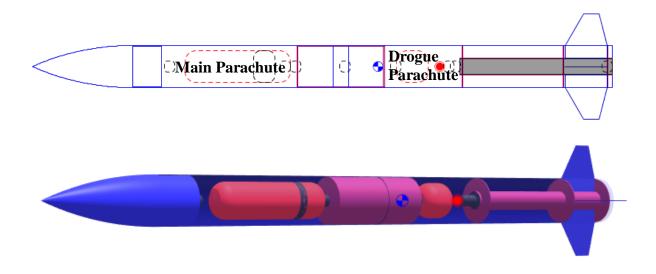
Fully rocket assembly with a side cross-sectional view and three dimensional model
